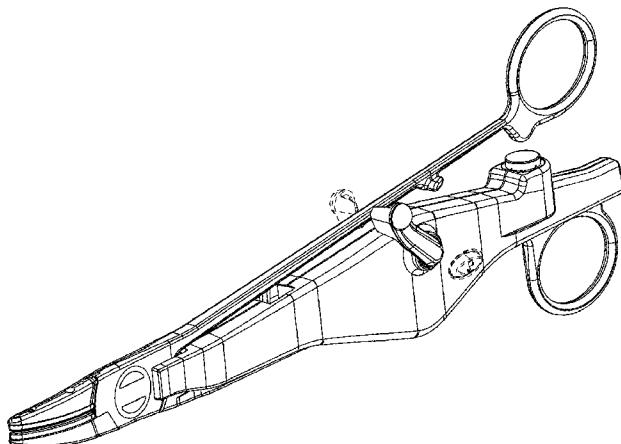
is a right side view of the open vessel sealer with mechanical cutter of FIG. 1;
